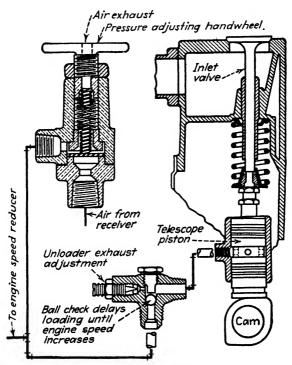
Pilot valve controls air to compressor inlet-valve unloader and engine-speed reducer.
